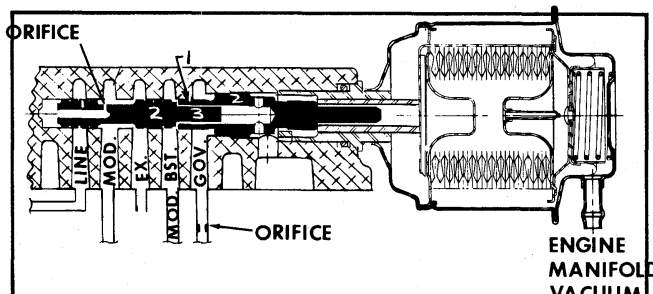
B-10 Vacuum Modulator and Valve Assembly
